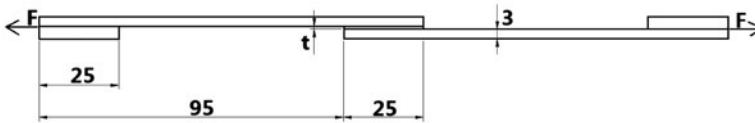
The single-lap joints' geometry (unit: mm and  $t$  is adhesive thickness).
